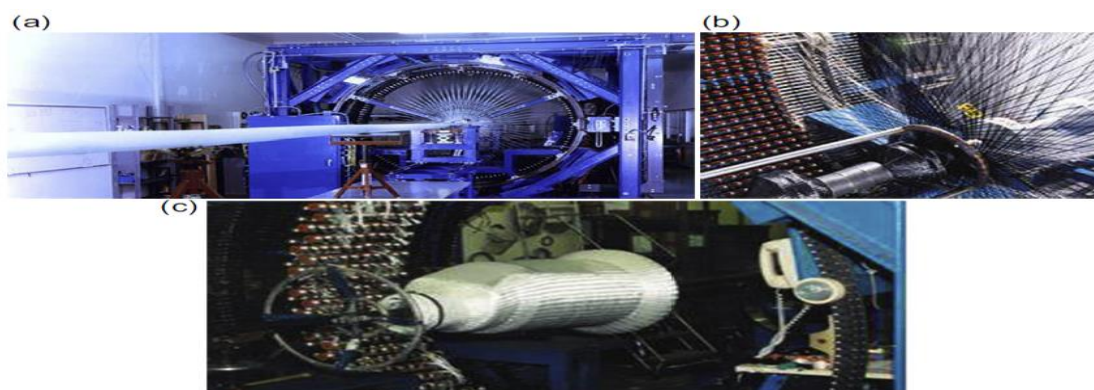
Row and column structured 3D cylindrical braiding machine and its structure a) front view of the machine b) inside view of the machine and c) 3D cylindrical braiding structure, 2009
